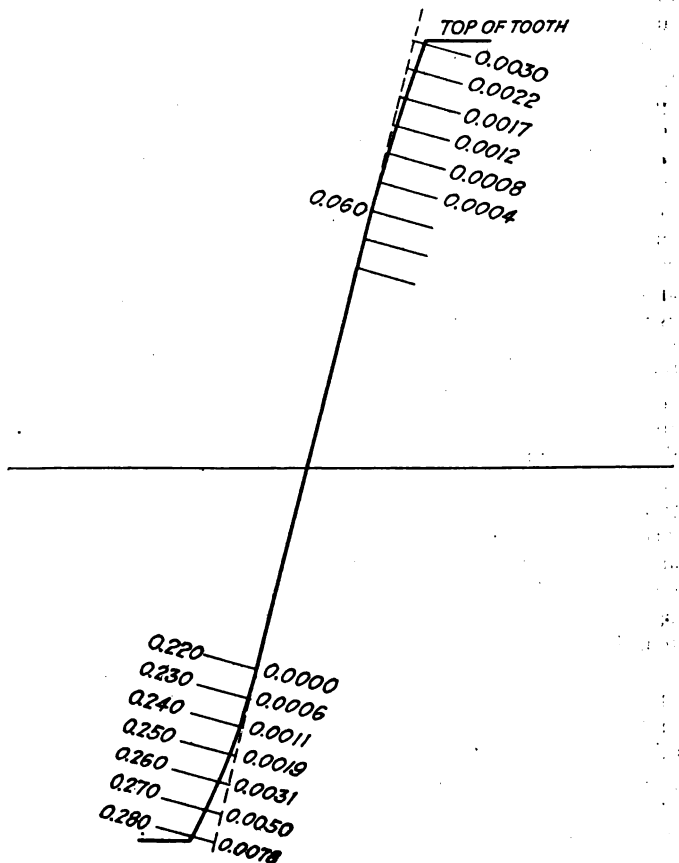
OUTLINE OF THE HOB FORM SELECTED FROM THE LAYOUT SHOWN IN FIG. 10
